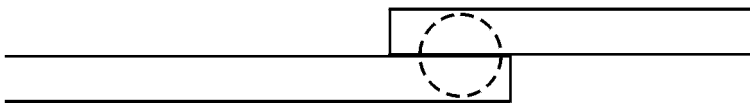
Configuration of wires for welding. The dotted circle shows where the beam should strike.
